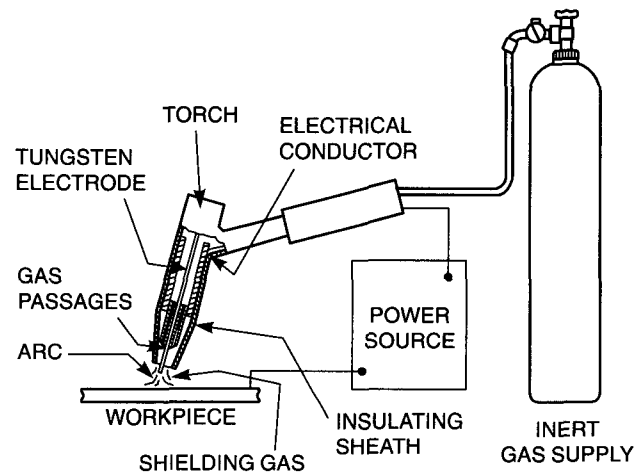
Typical Equipment Used for Gas Tungsten Arc Welding
